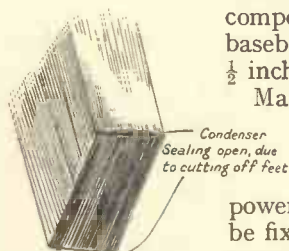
THIS SHOWS WHAT HAPPENS WHEN THE FIXING FEET OF A CONDENSER ARE REMOVED.
